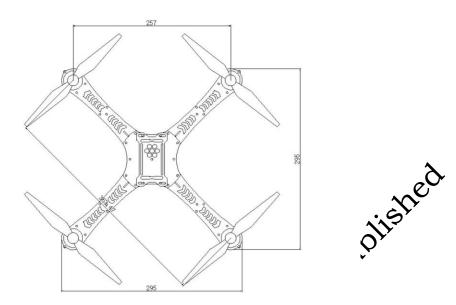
Top view of drone STEP3. Install Motors: Attach the brushless motors to each arm of the frame using the provided screws. Ensure that the motor wires are facing inward towards the center of the frame for asier wiring later on.
